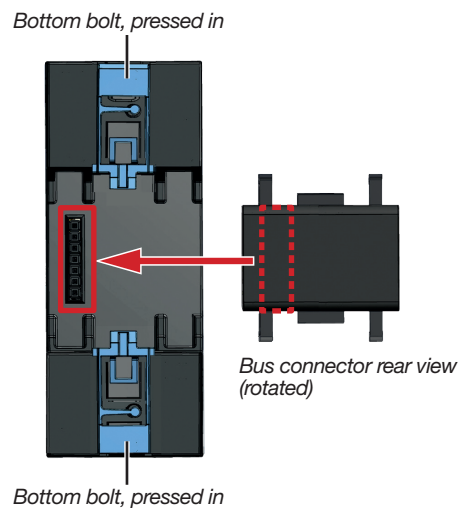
Bus connector installation: Measurement device and bus connector rear of device
